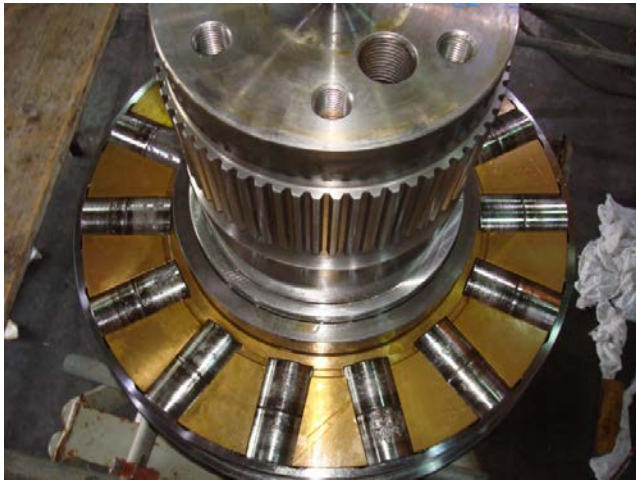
Extruder Gearbox 2 Stages Tandem Bearing
